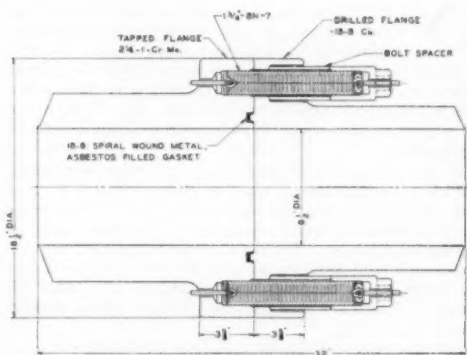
SECTIONAL VIEW OF SPIRAL-WOUND METAL ASBESTOS-
